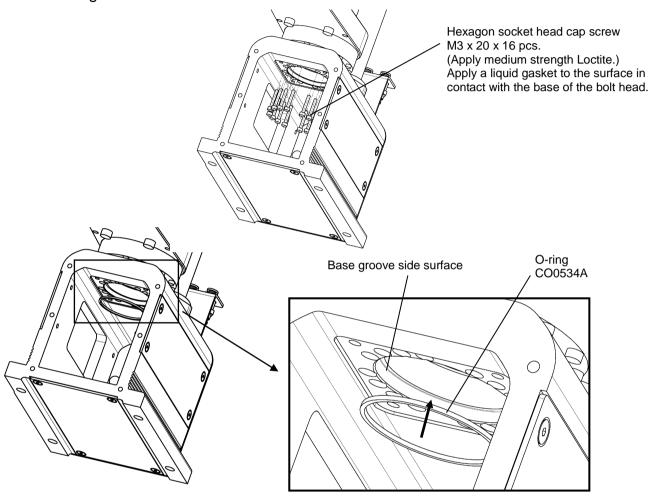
Mounting arm 1 and O-ring (KHL-300, KHL-400)
